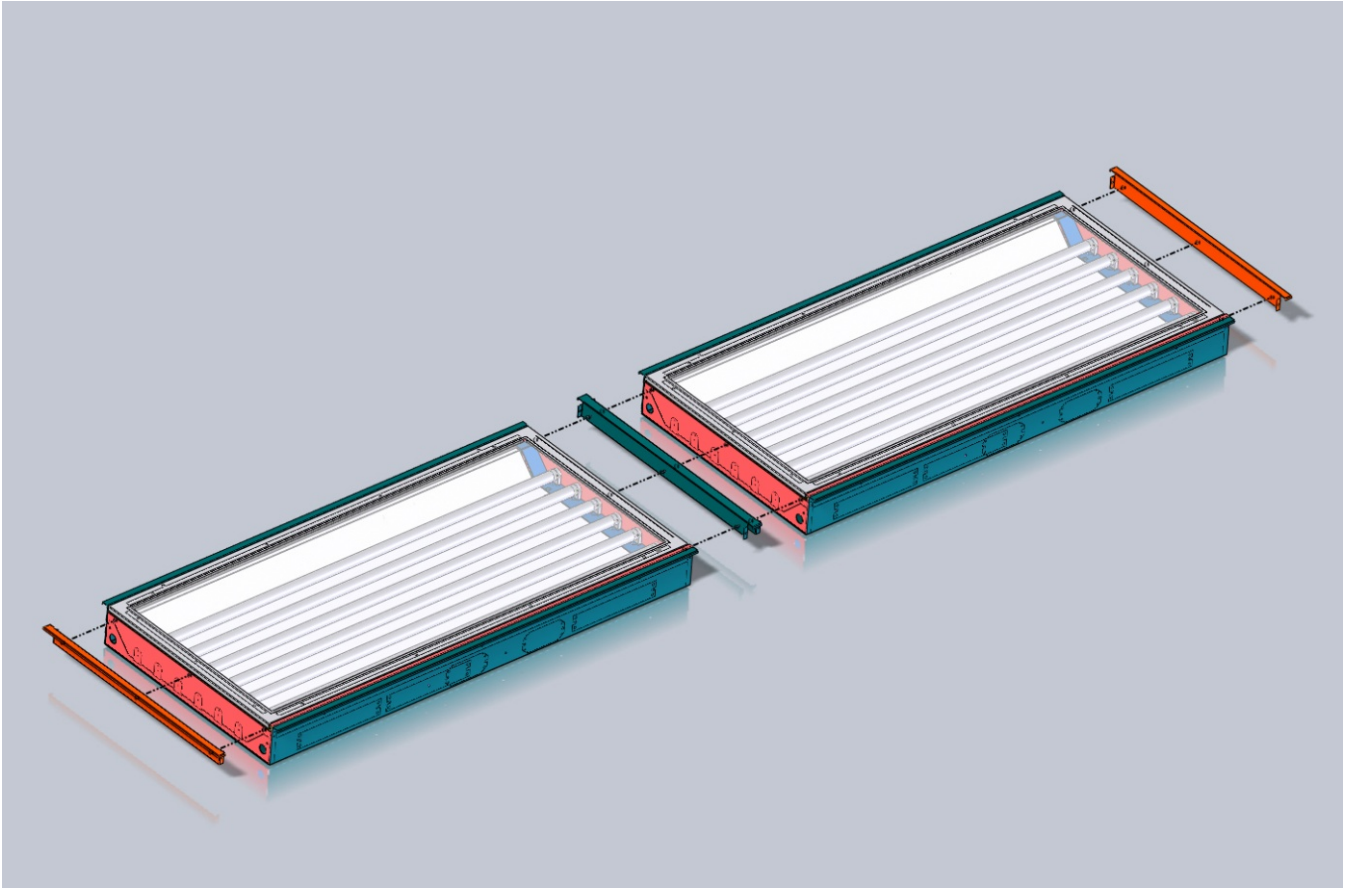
Flange and False Flange Mounting -Two Troffer Design
